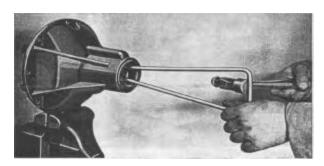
Removing Pinion Shaft Oil Seal—J-489 Axle Shaft and Pinion Shaft Oil Seal Remover
